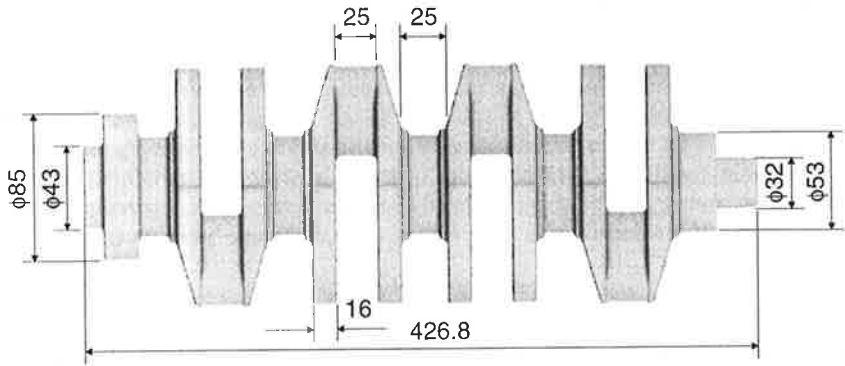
Schematic of the casting. Dimensions are given in mm.
